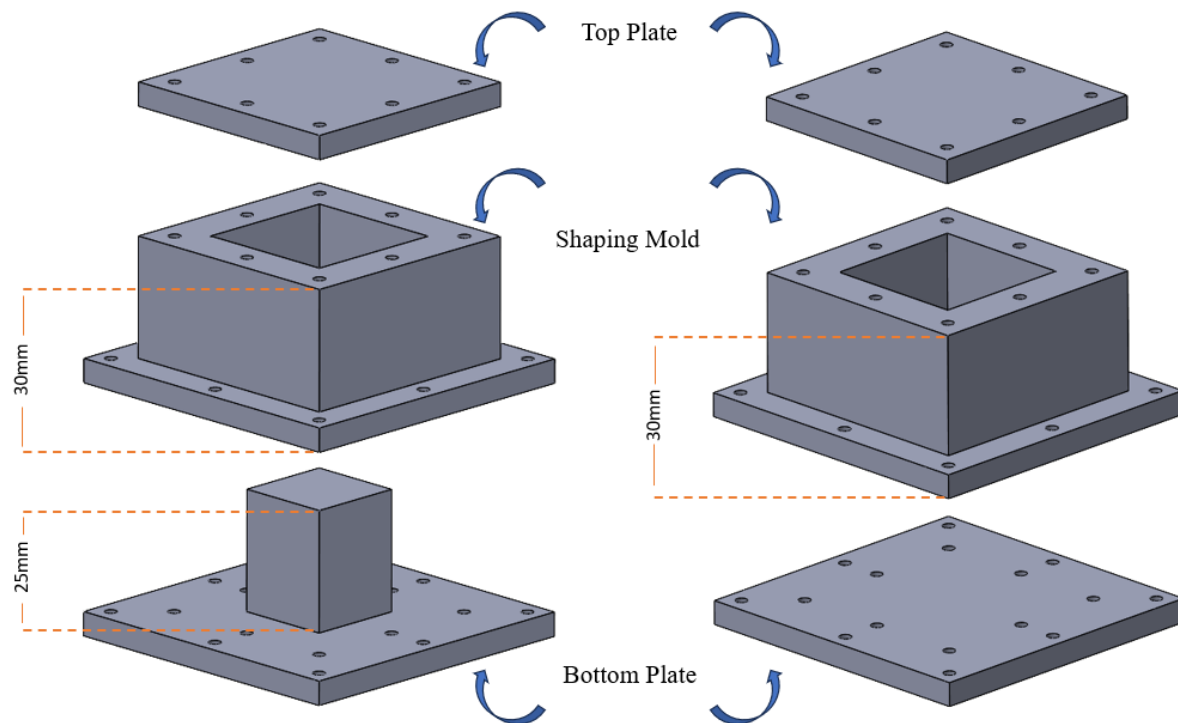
Exploded view of mold parts for cubic MRF-MRE 30mm (left) & cubic MRE 30mm (right) samples
